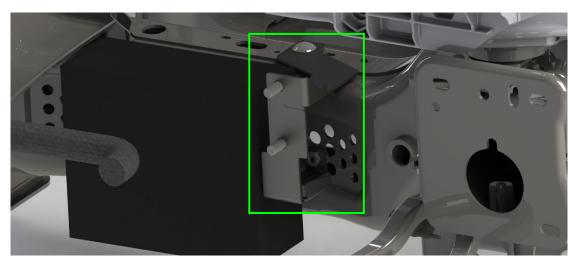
Tank Support Bracket Installed with Carriage Bolt
